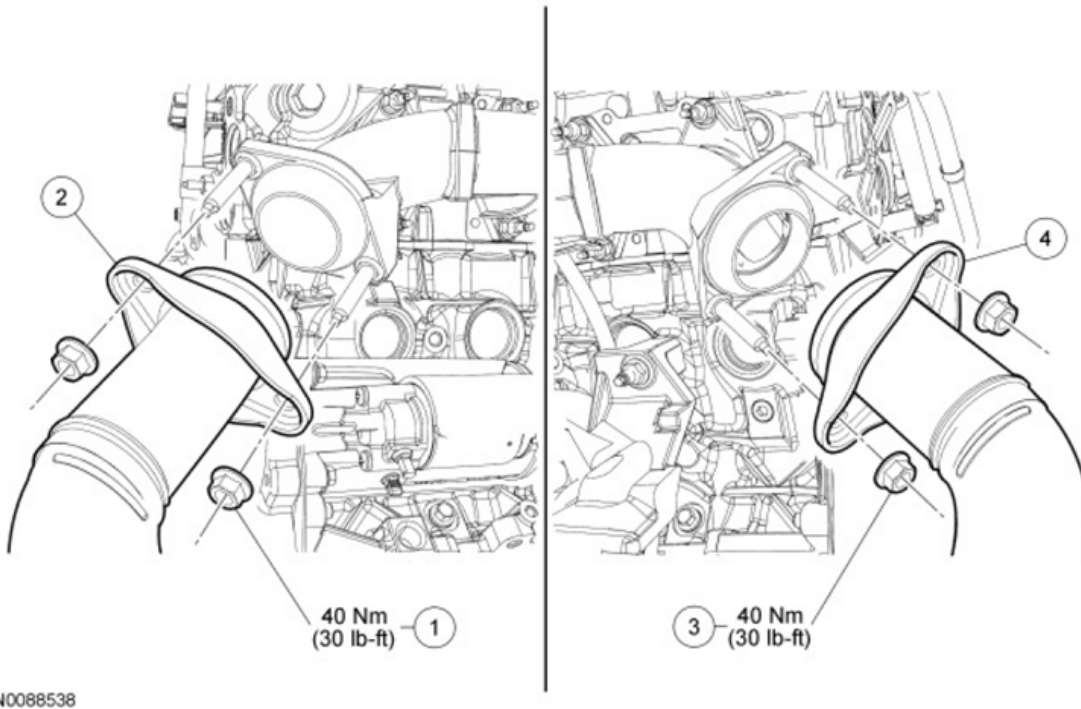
Identifying Exhaust Y-Pipe Flange Nuts With Torque Specifications (RH And LH)
